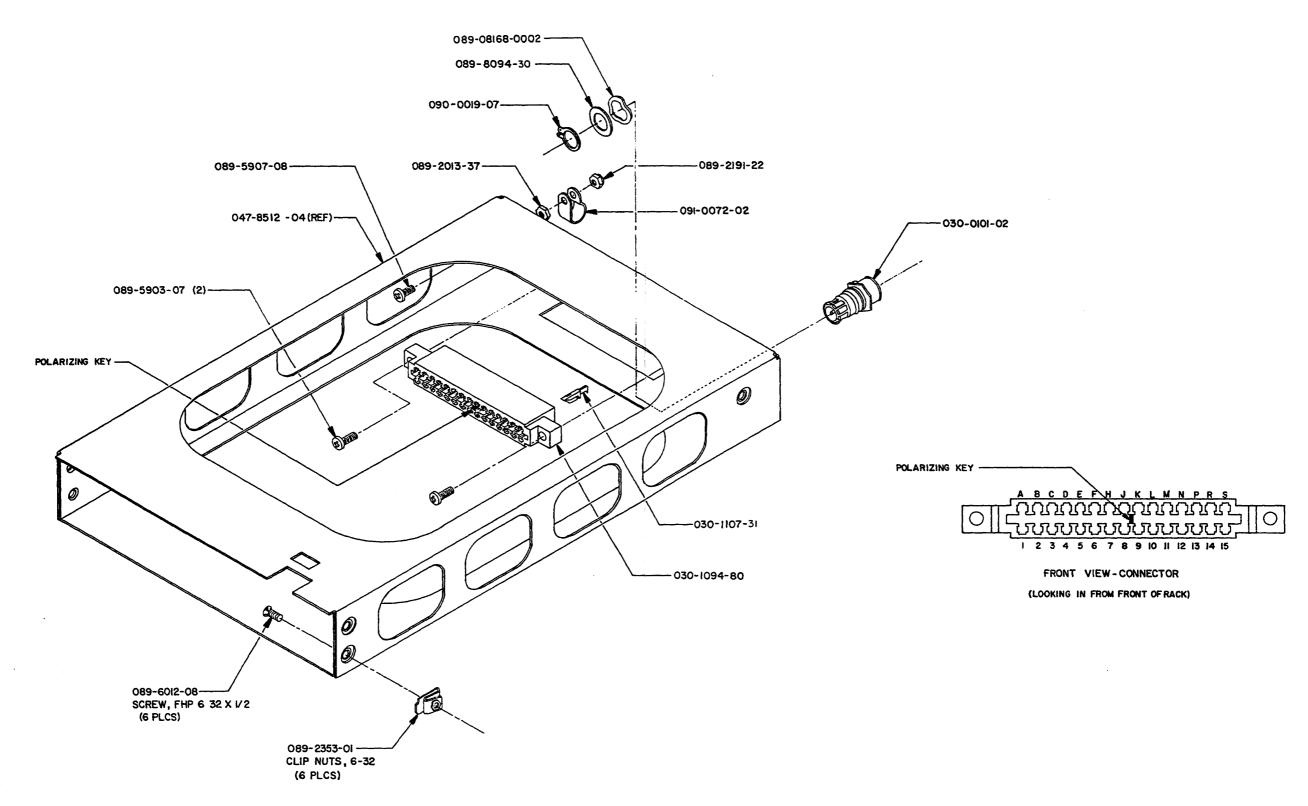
INSTALLATION ASSEMBLY DRAWING DWG. NO. 155-05690-0000, REV. 4
